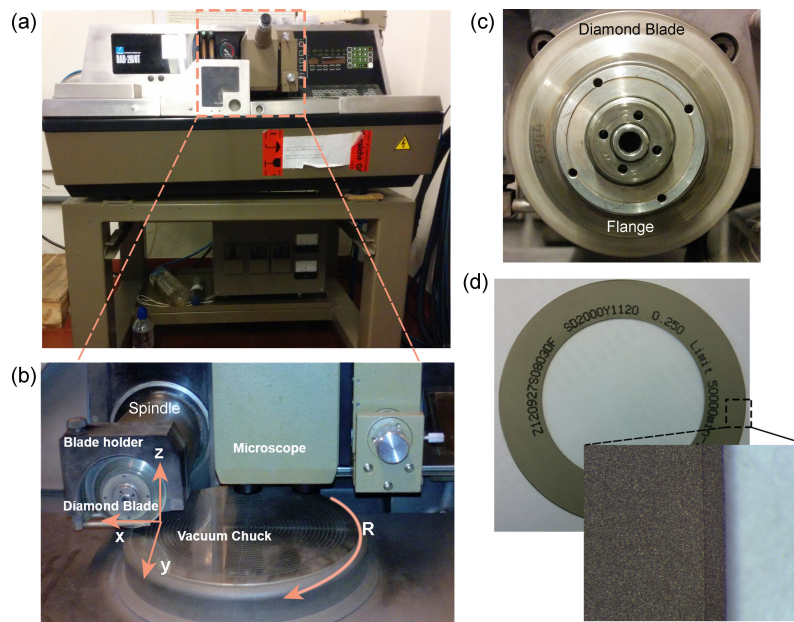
Blade cutting setup. (a) Photo of the dicing saw equipment. (b) Saw blade setup. (c) Blade mounting surface, and (d) photo of Z09 blade used in the cutting steps. Zoom images were performed with a LeicaM80TM stereo microscope.
